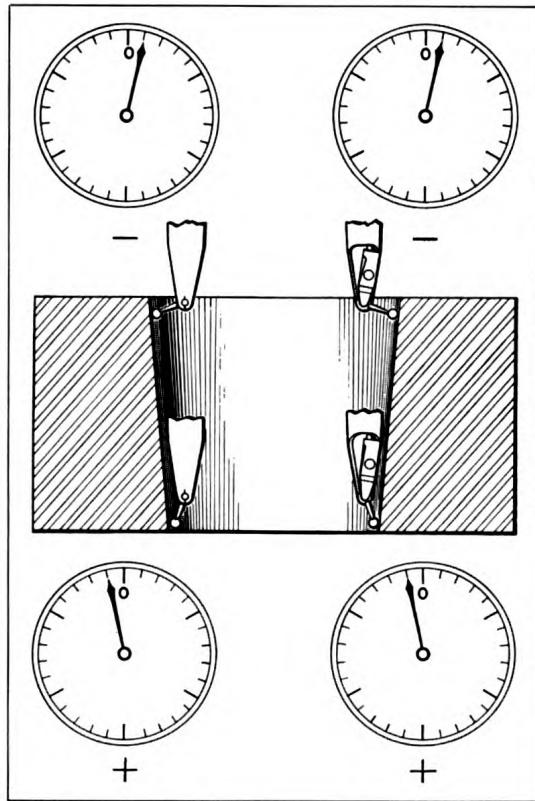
Taper in a hole is revealed by indicator reading during axial movement.
